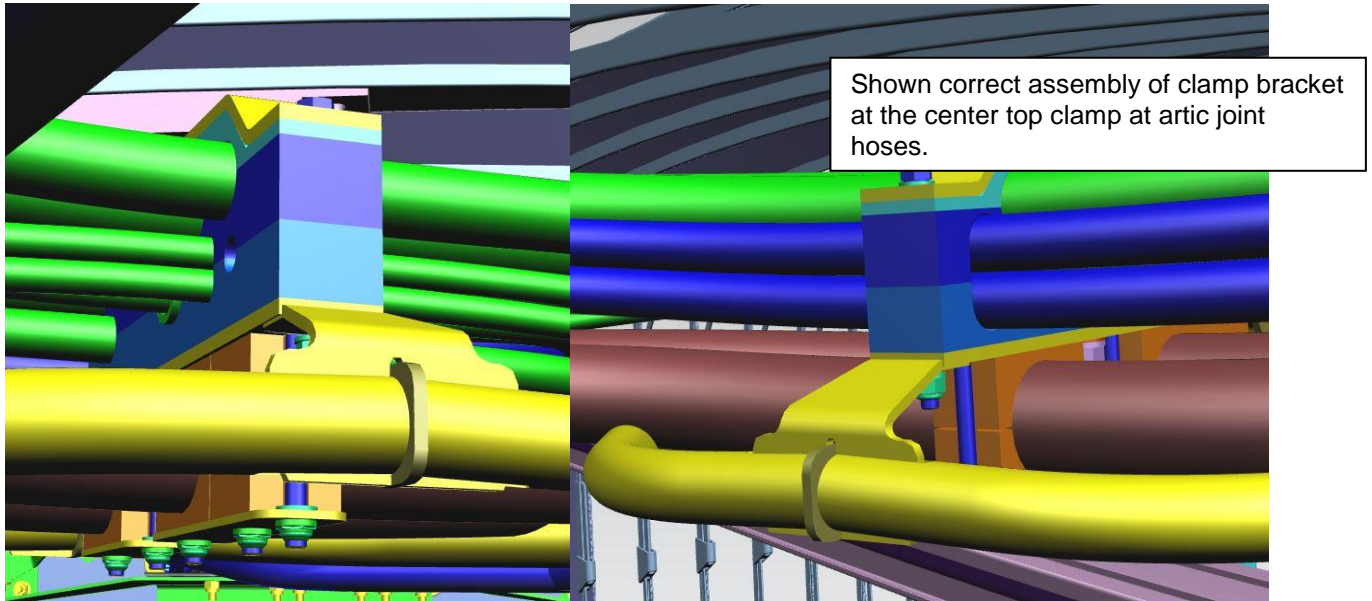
B: SHOWN VIEW OF CENTER CLAMP SUPPORT
